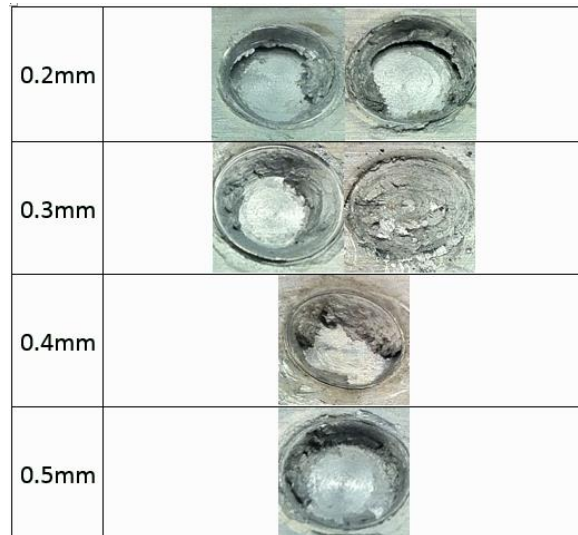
Weld surface in RFSSW joints between Al 6063 and DP 600, produce using 1800RPM, 2.5s welding time and various plunge depths
